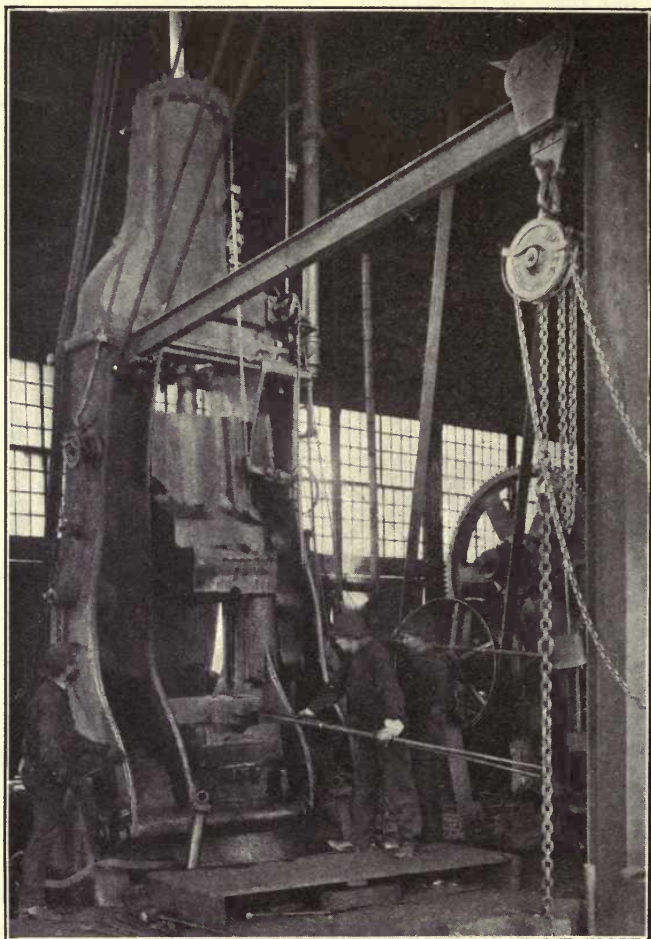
400-pound crank-shaft under hammer ready to drop the die.
